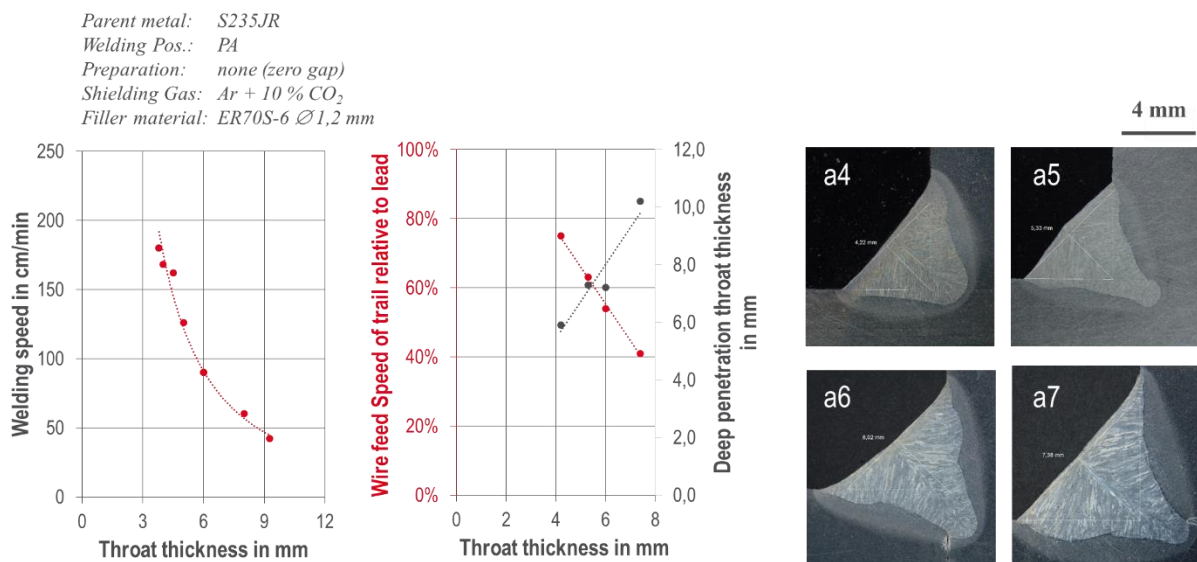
Maximum achievable welding speed for fillet welds welded in PA position with PMC/PMC. The wire feed speed spreading is continuously decreased to maintain a deep penetration.
